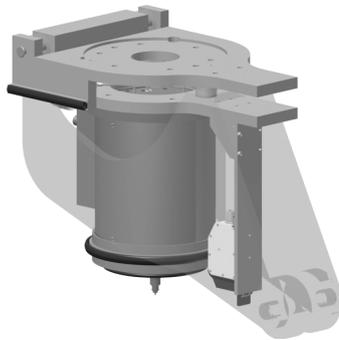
Welding head for FSW (with spindle, pin, camera, and pressure roll)
